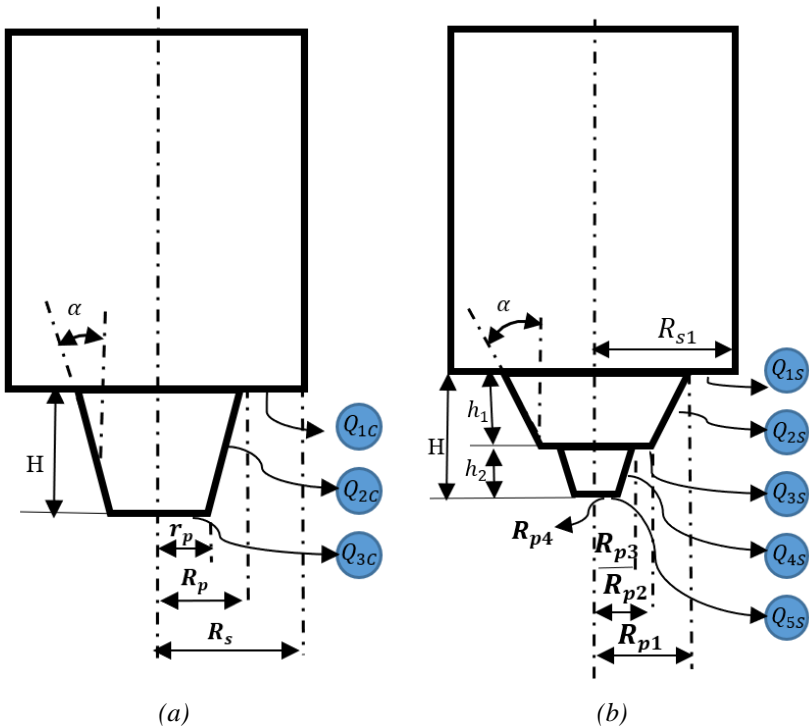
Proposed FSW tools a) Conventional conical pin tool b) Stepped conical pin tool.
